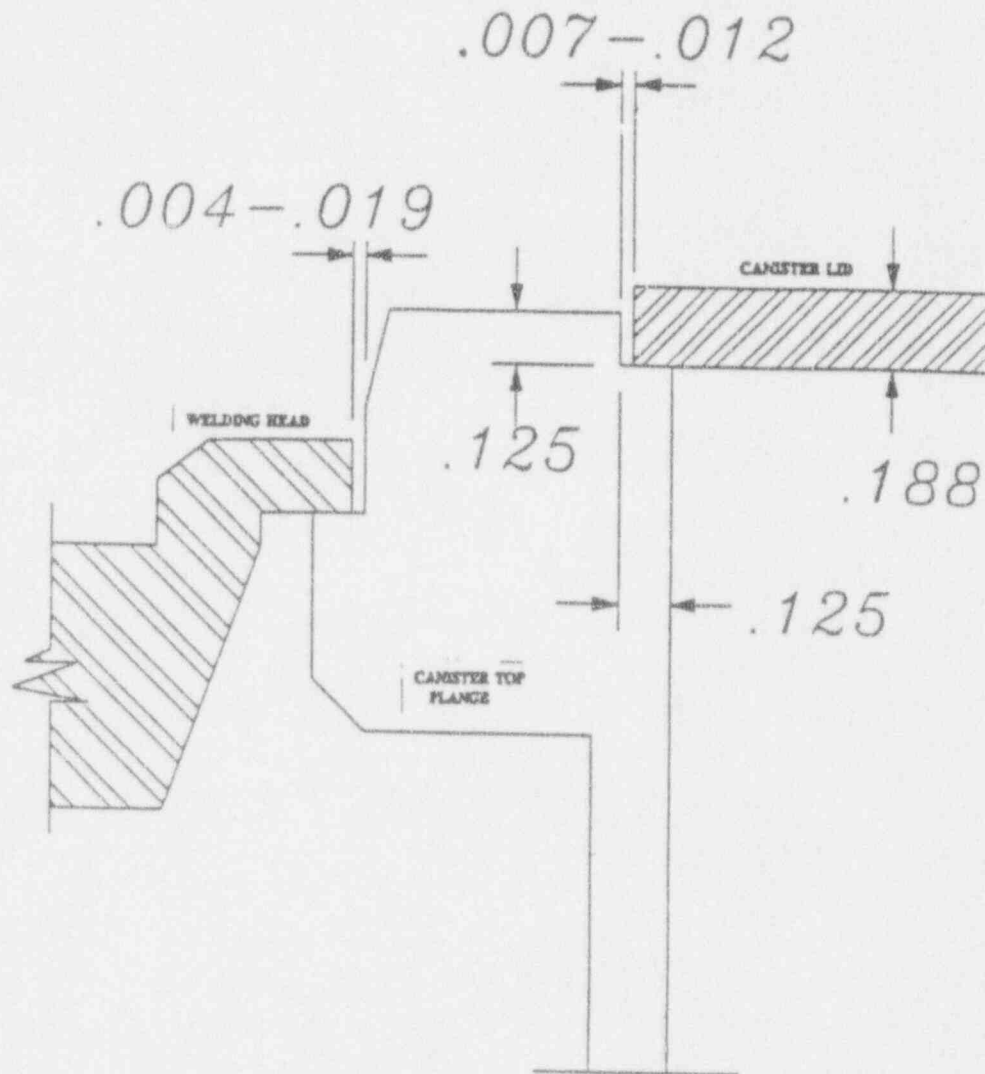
Canister, Lid and Weld Head Arrangement with Tolerances
